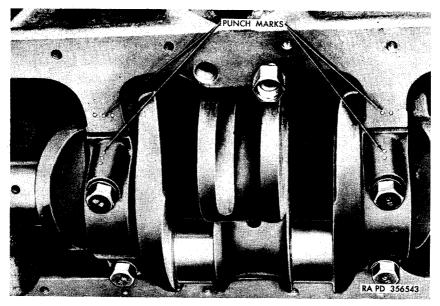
Punch marks on cylinder block and crankshaft bearing caps.
